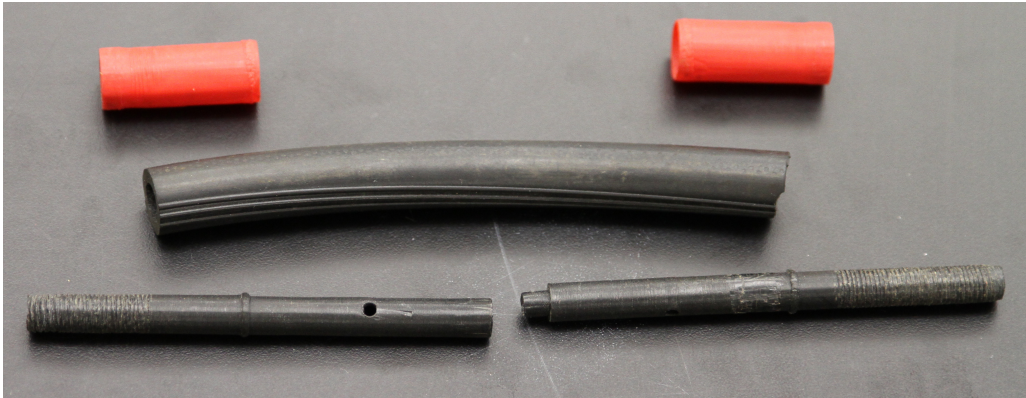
3D Printed ABS Probe Parts (black) and Sleeves (red) (Misilo III, 2018)
